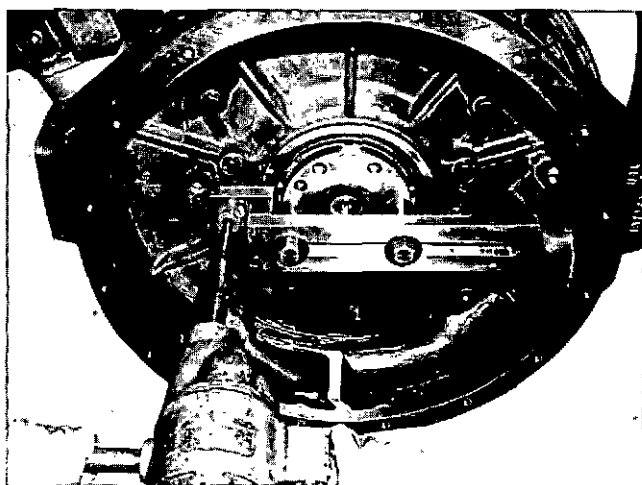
, V414204. Drill and ream flywheel housing dowel holes
